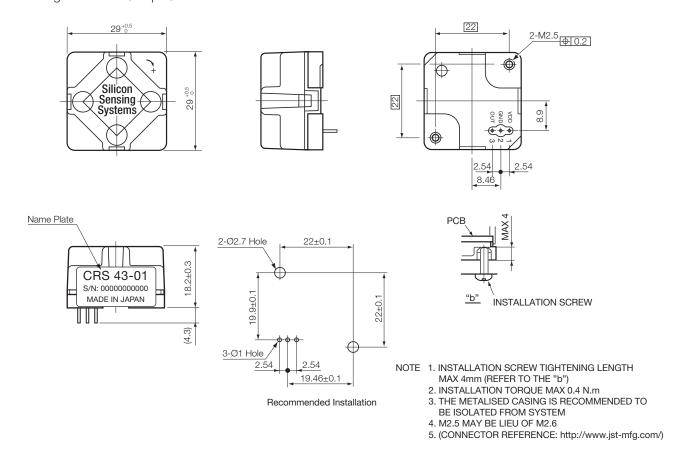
CRS43-01 Interface and Overall Dimensions
